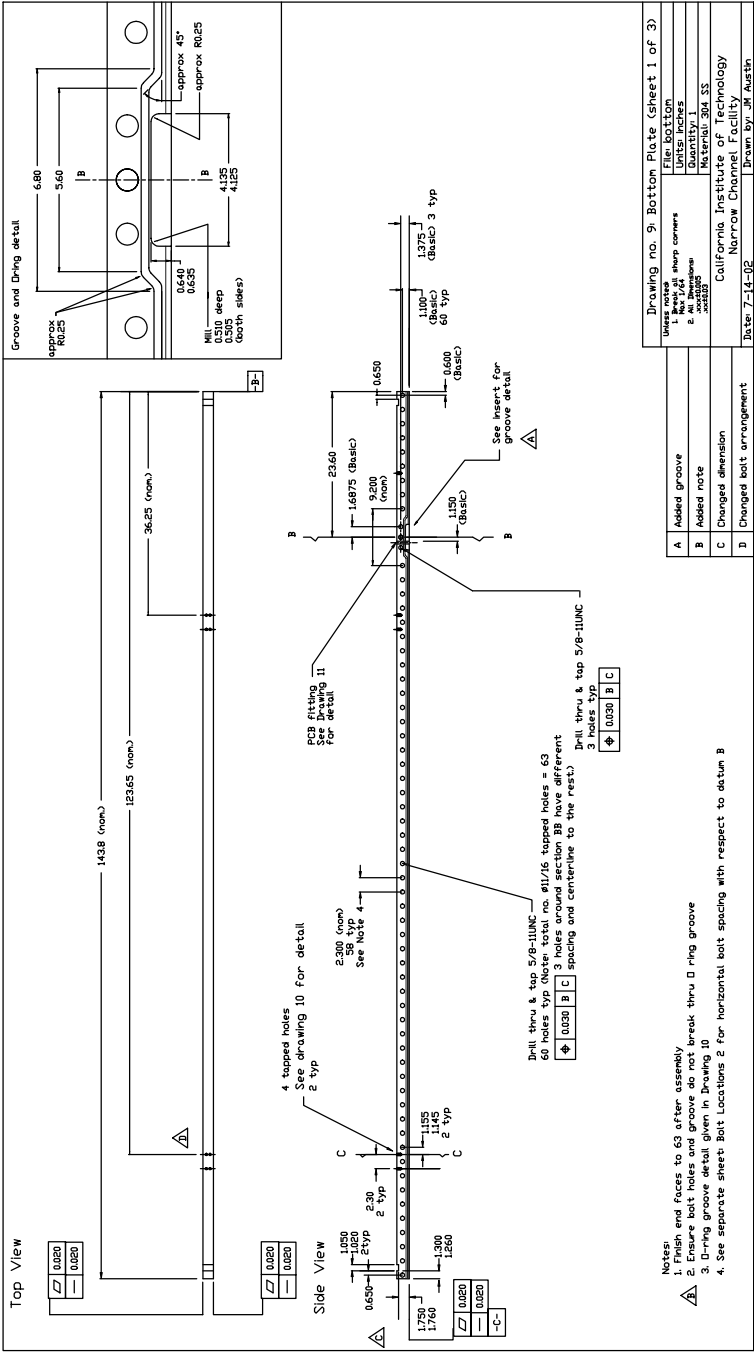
Bottom Plate (sheet 1 of 3), Dwg No. 9
